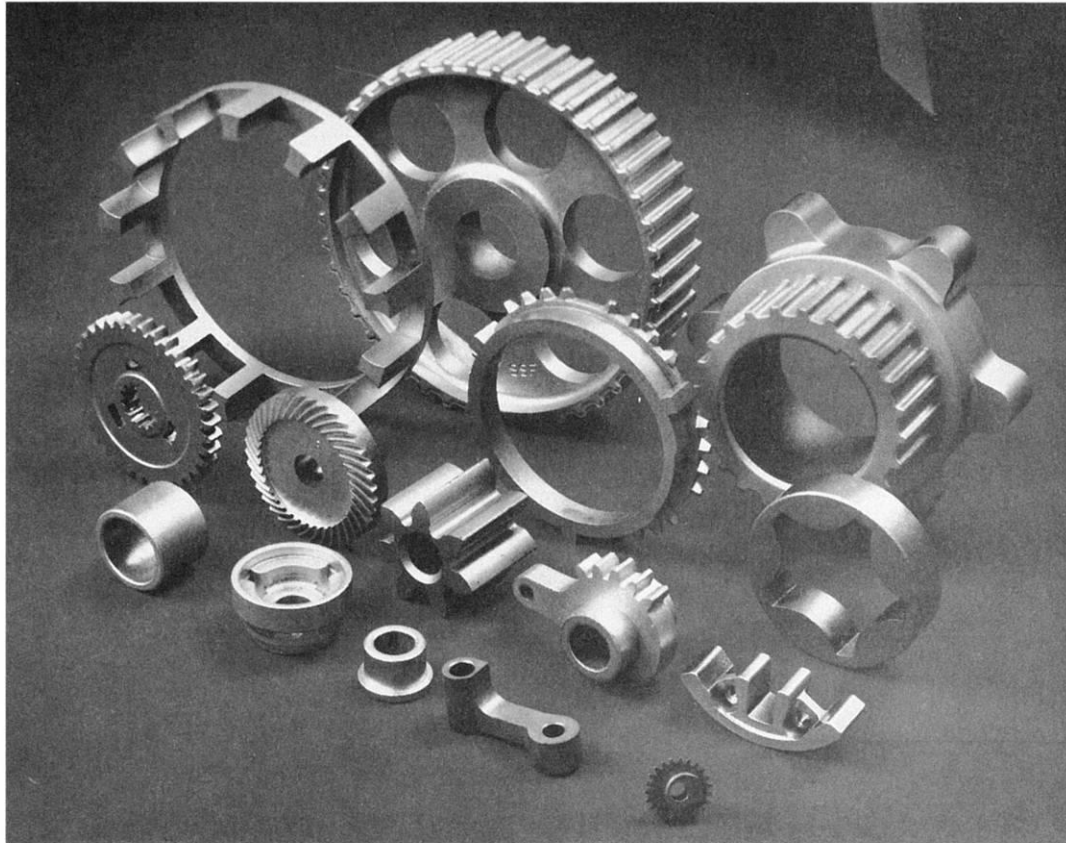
A collection of powder metallurgy parts (photo courtesy of Dorst America, Inc.).
